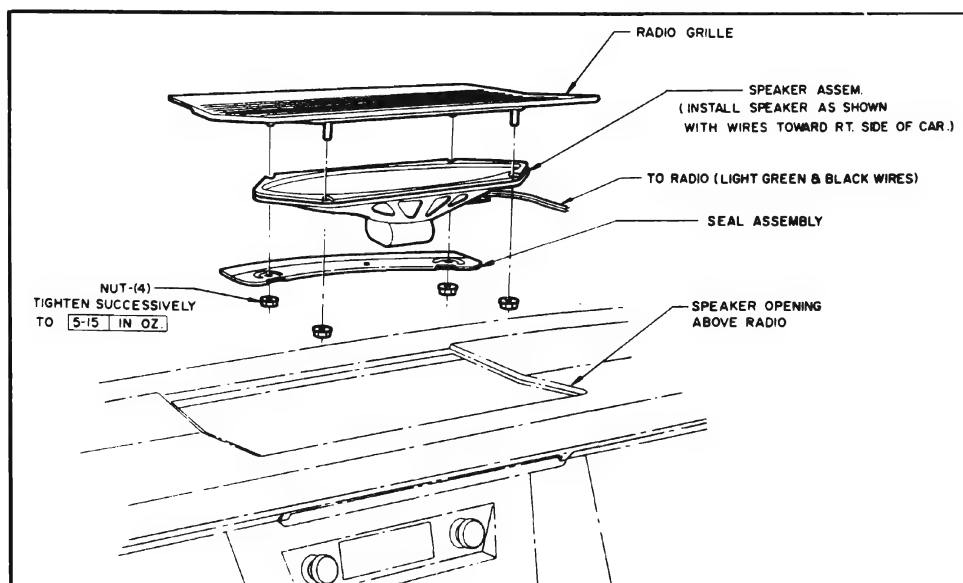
Front Radio Speaker Installation - 4400, 4600 and 4800 Series
